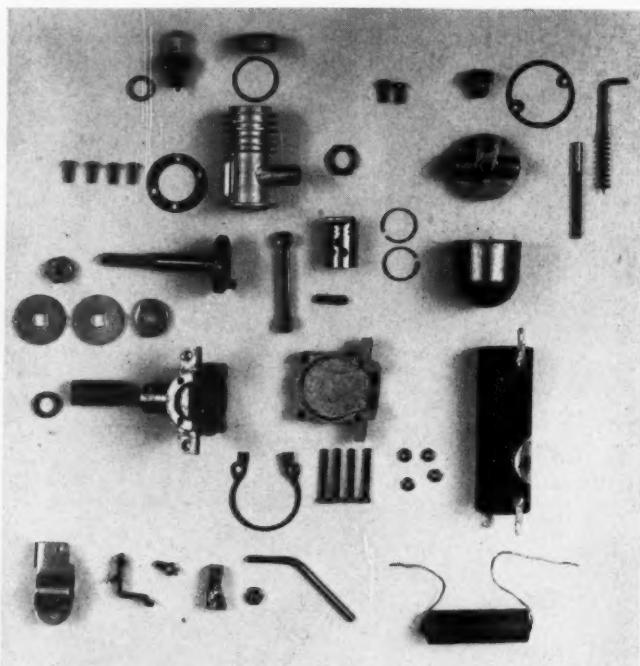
An idea of the job involved in the small power plant may be gained from these disassembled parts
